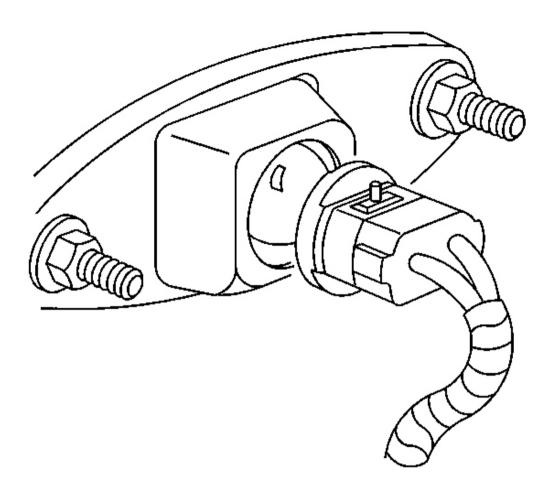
Sidemarker Lamp Socket At Tail Lamp Opening Courtesy of GENERAL MOTORS CORP.
